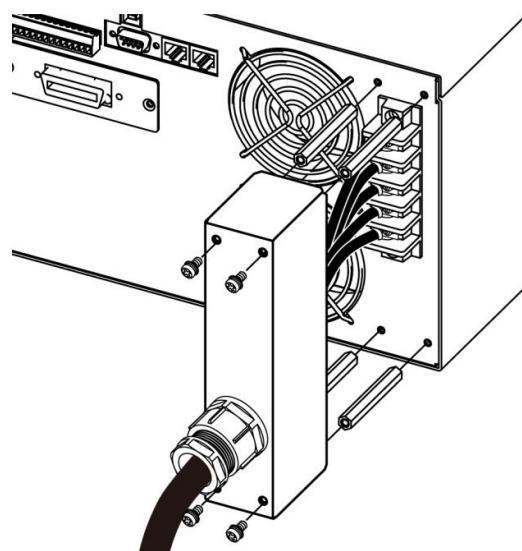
Assembling the 62050P Input Terminal Safety Cover - 3
